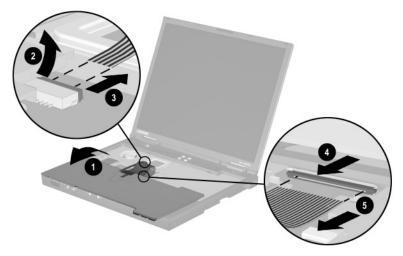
Disconnecting the Pointing Device and Keyboard Cables
